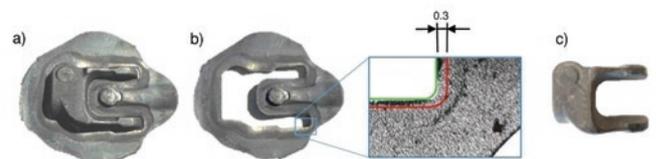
View of a yoke forging: a) with the flash before trimming, b) the flash after trimming, c) the forging after trimming
